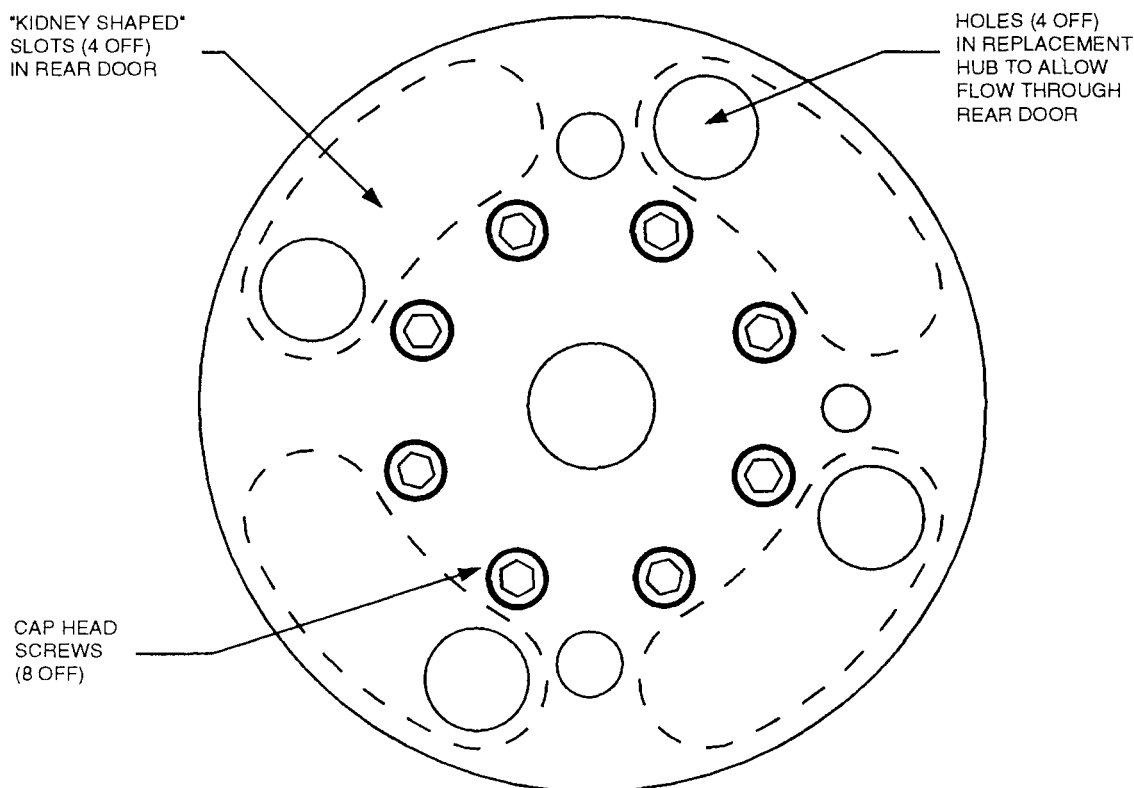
REAR DOOR PLATE VALVE—REPLACEMENT HUB
